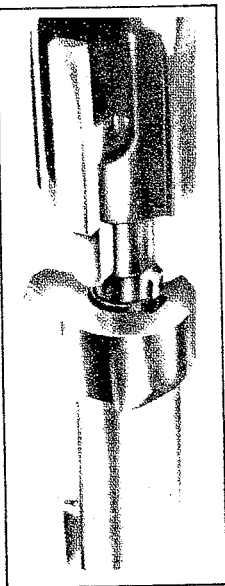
Square boss correctly positioned and about to be inserted in indexing groove.
